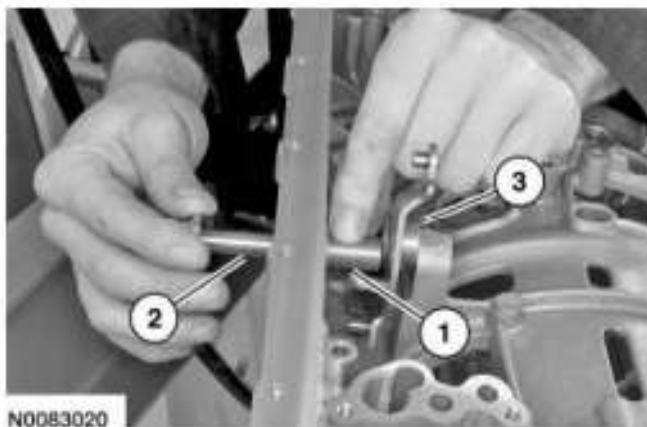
Identifying Manual Valve Detent Lever Assembly And Park Pawl Actuator Rod
